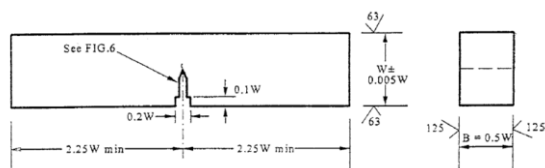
Shape and dimensions of three-point bend fracture-toughness sample. The specimens were 10 mm wide ( $W$ ) and 5 mm thick ( $B$ ) 52 mm long.
